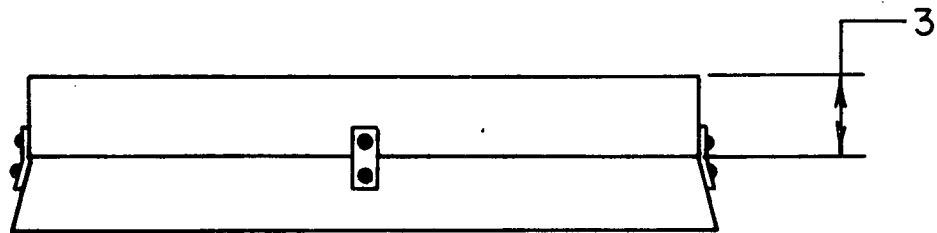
B. View of modified cone showing drive post, sheet metal ring, plexiglass shield and reaction post.
